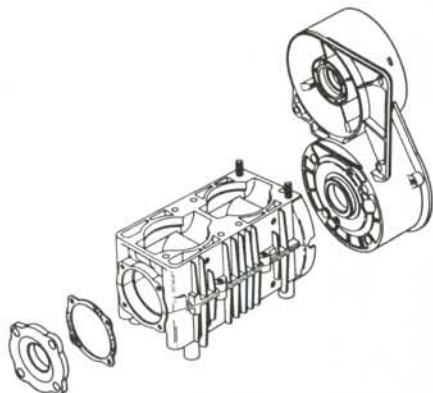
On small block engines, end plates control crankshaft end play instead of snap rings shown in Fig. 10.
